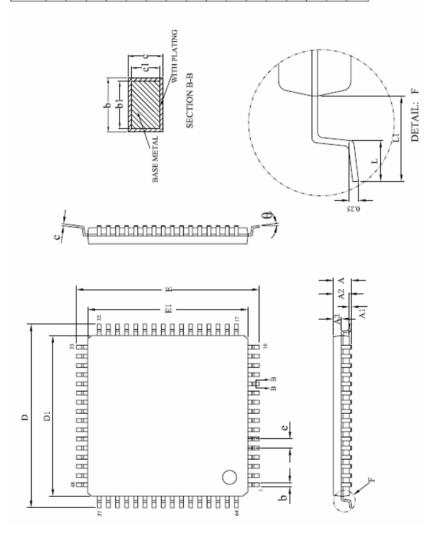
LQFP64-10x10mm Package Dimension Parameter
